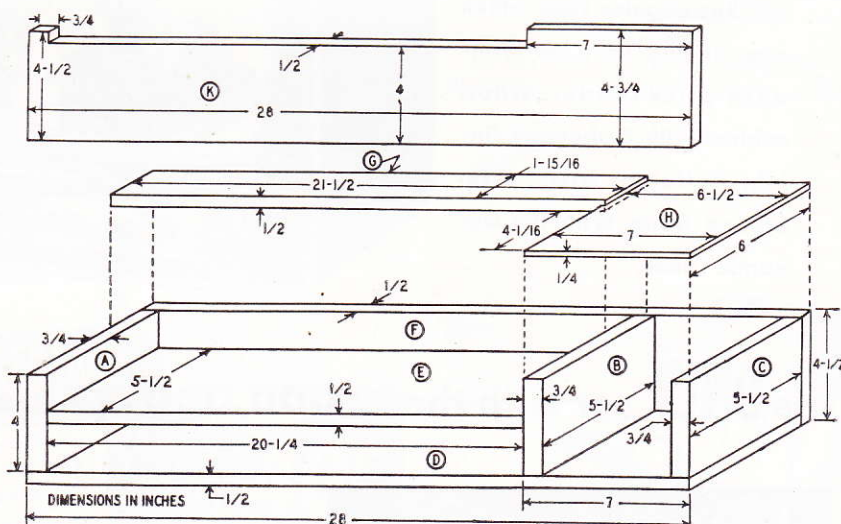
Exploded diagram of the keyboard housing showing assembly details.
